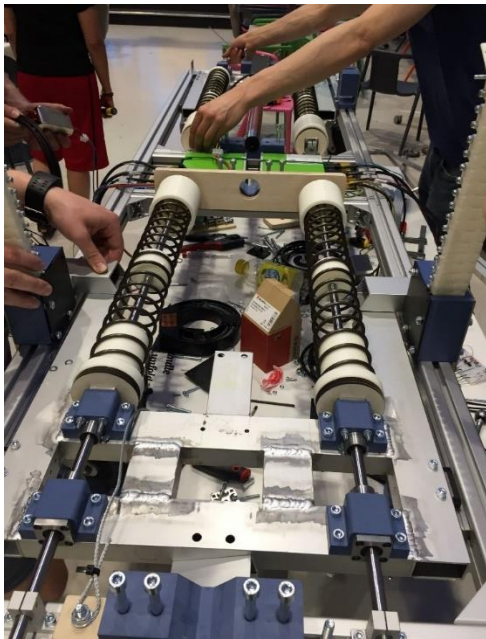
Linear Motor Drive (Green) and 3D printed chain arrangement (Self Elaborated)
